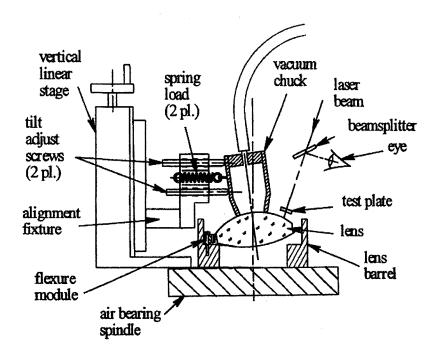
Schematic of a technique for aligning a lens with respect to flexures in a barrel using Technique No. 1.
